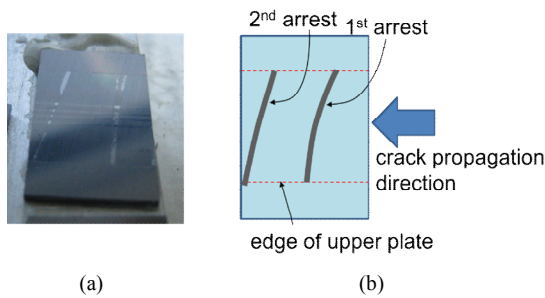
(a) Photograph of surface of delaminated bottom plate of fixed jig; (b) schematics of the surface in xy-plane.
